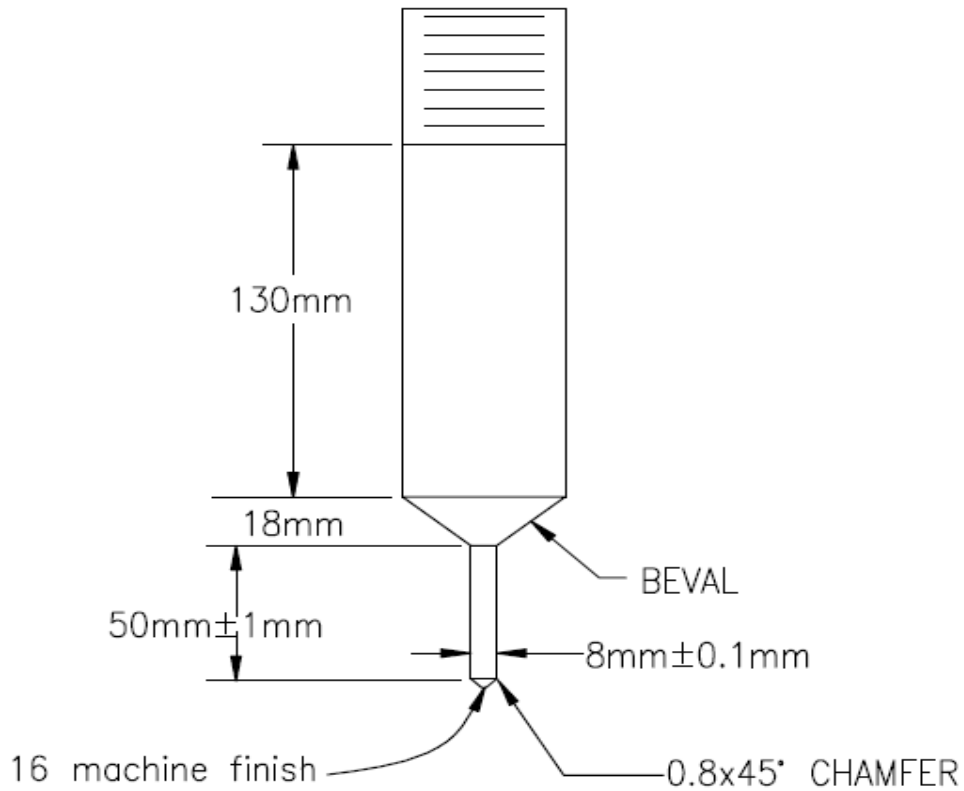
TEST PROBE DETAIL (NOT TO SCALE)
